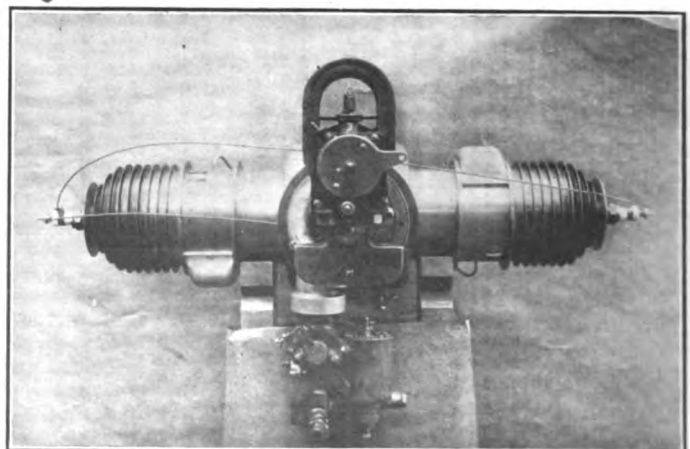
Farcot 2-cylinder 2-cycle motor, side view, showing location of the carbureter and other details
